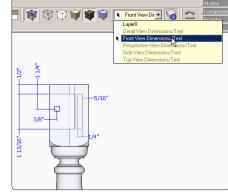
For the template view, place the necessary detailed dimensions, then place them on the proper layer so that they appear only on the template.
